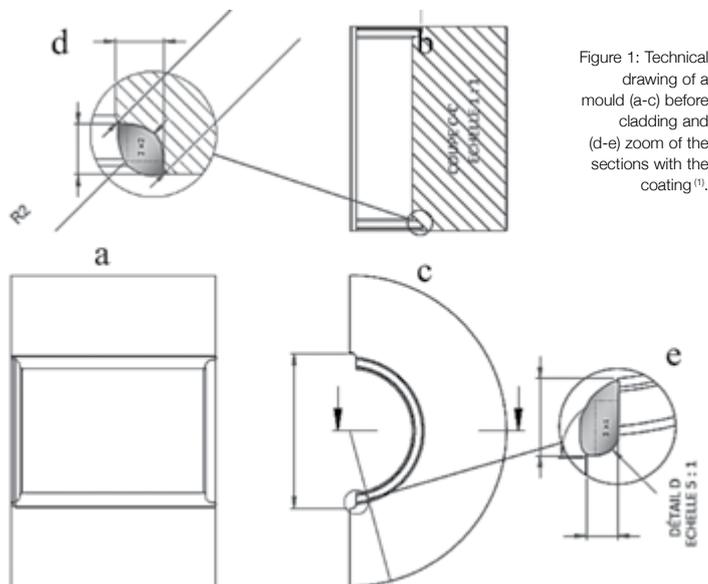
Technical drawing of a mould (a-c) before cladding and (d-e) zoom of the sections with the coating⁽¹⁾.
